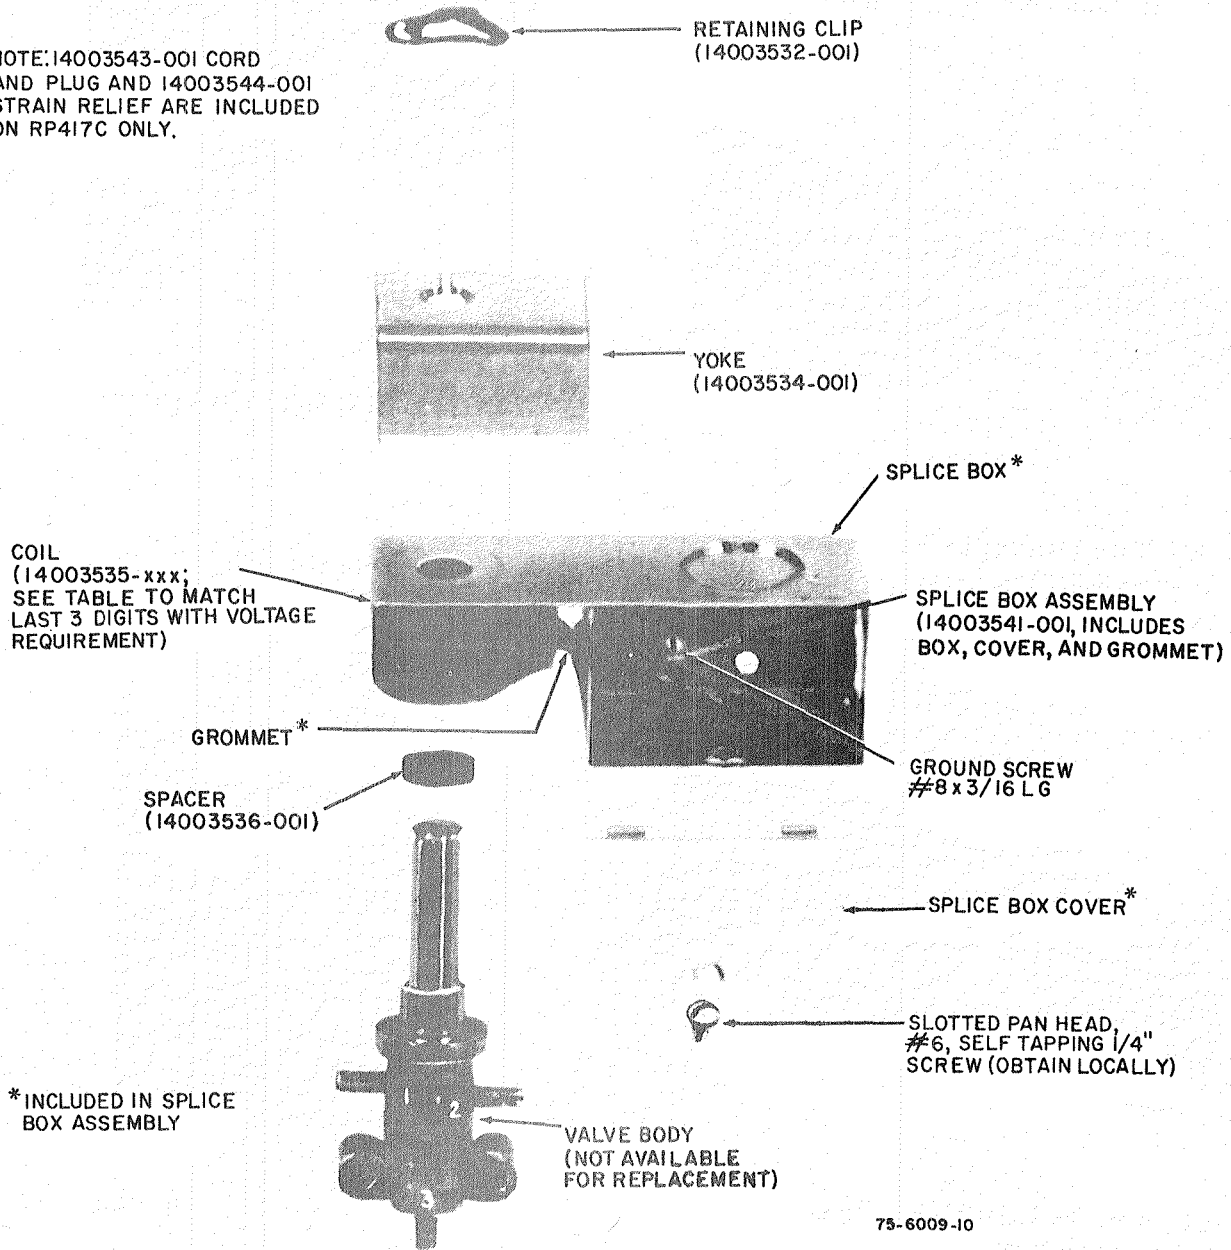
Exploded View of the RP417A, RP417C, or RP817A.
